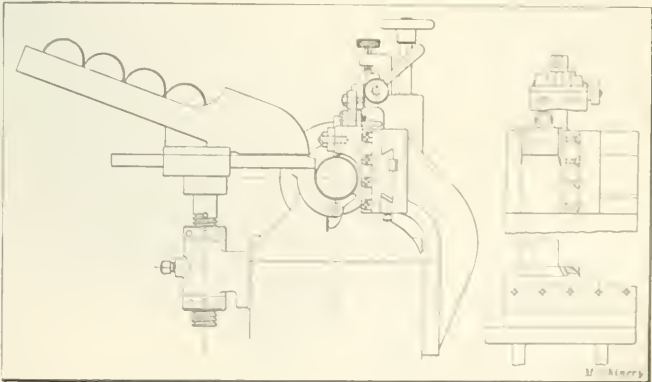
Partial End View of Machine, showing Arrangement of Feed Chute to deliver Castings to Machine
